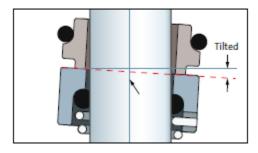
Uneven depth of wear track on the seat caused by tilted/crooked mounting
